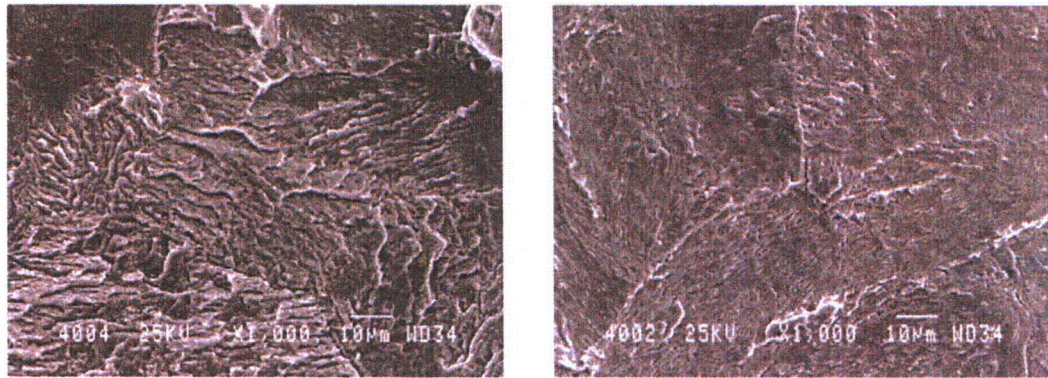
Fracture surfaces of the Unit-3 samples
